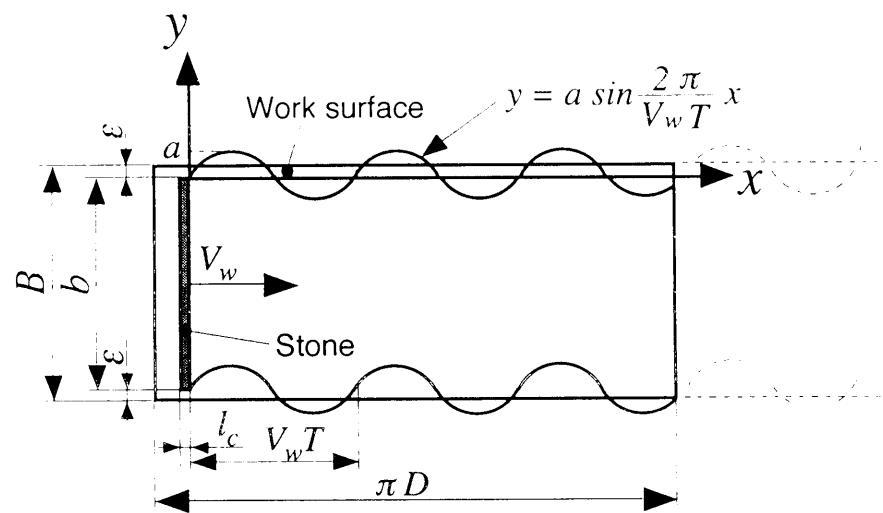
Schematic illustration of expansion of working surface (Cylindrical superfinishing)
